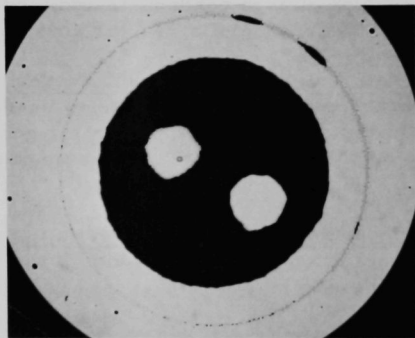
Considerable Porosity and Two Large Nonwetted Areas Are Evident in Brazed Joint Where the Thermocouple Sheath Passes through Bulkhead. This joint was brazed in helium-hydrogen mixture and pieces were not pretreated.
